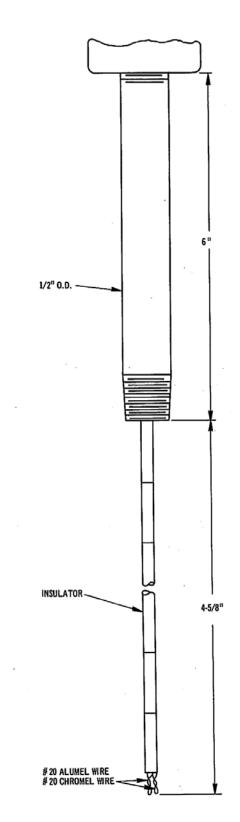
Figure 6.9-4 Thermocouple Assembly for Thermowell [Vol. II, Chapter 6, p.6.9-7]
